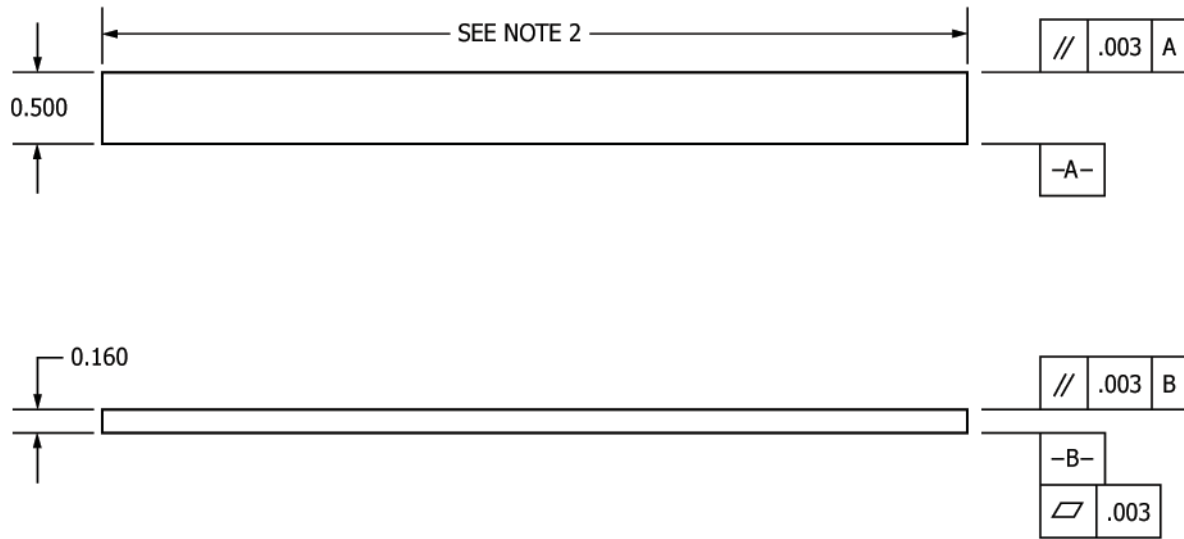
Standard Flexural Test Specimen Drawing (Inch-Pound)
